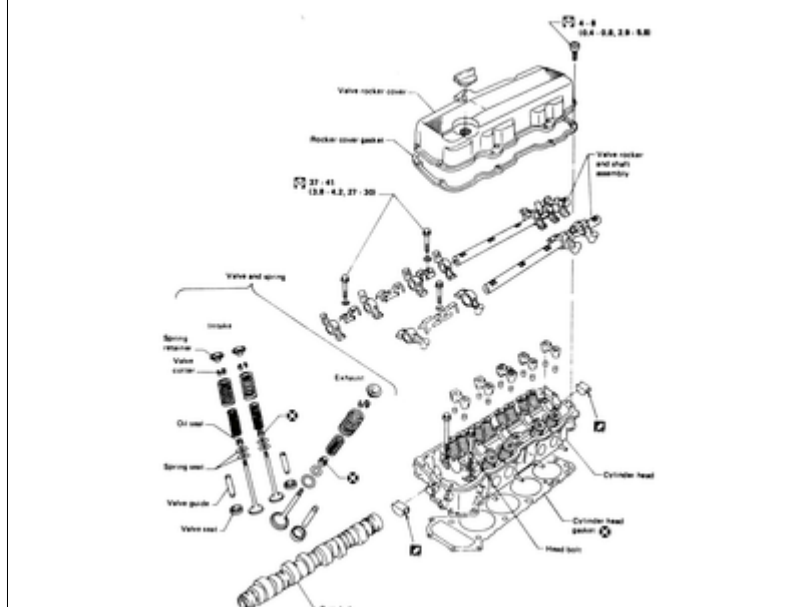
Exploded view of the cylinder head assembly — KA24E engine
